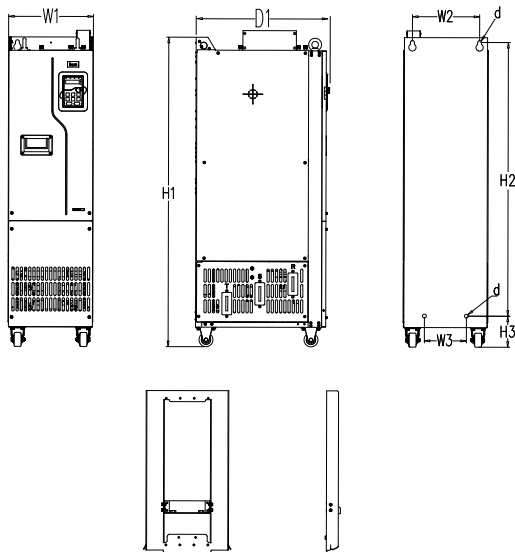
Flange mounting for VFDs in T8–T9 frames
